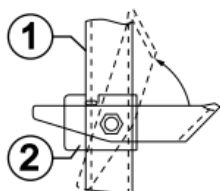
End Stop Assembly (Stainless) - Top End Stop (Gated) (P/N 506274)
